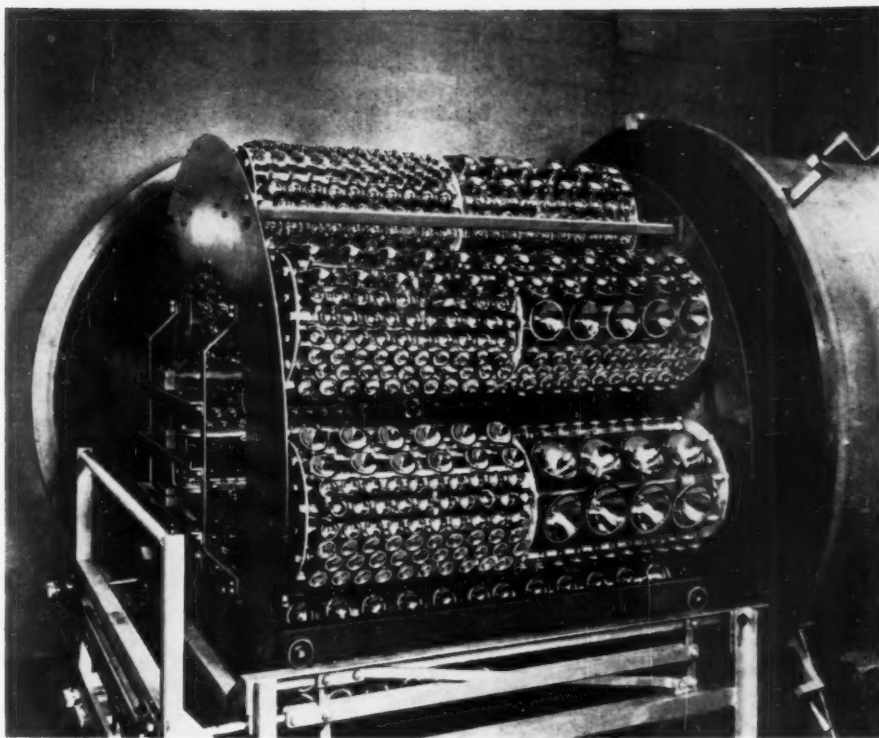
This loaded jig is ready to carry the work mounted on it into the vacuum metalizing cylinder.
